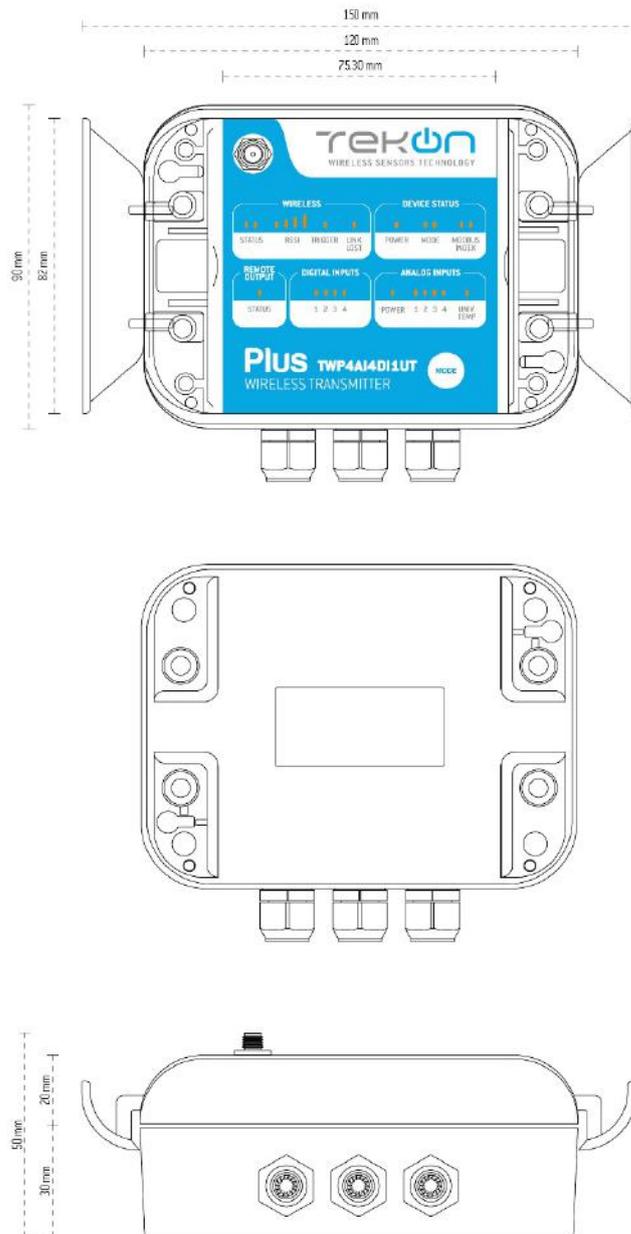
TWP-4AI4DI1UT transmitter mechanical interface and dimensions
